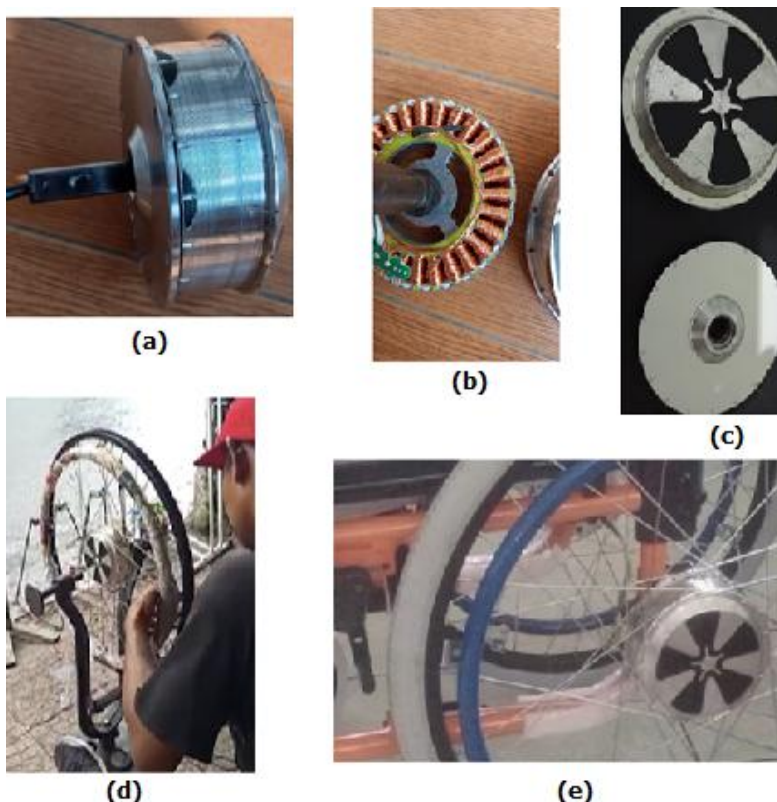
(a) BLDC Motor (b) Casing Separation (c) Marking the Spoke Holes (d) Integration of the Rim-Spoke-BLDC (e) Integration of the Wheel into the Frame
